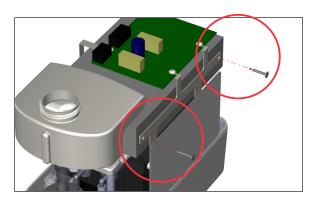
Step 2 Install two truss-head screws on rear bracket
